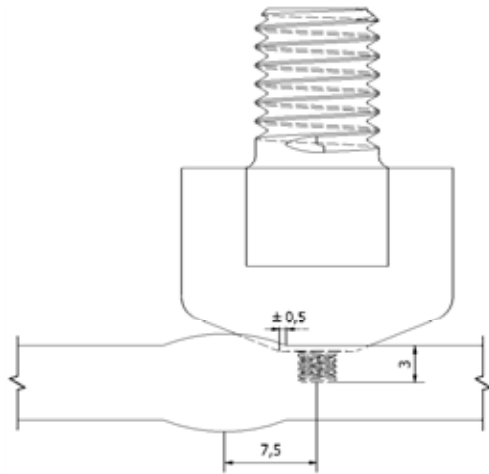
Schematic representation of the tool position relatively to MIG welded plate (dimensions in mm).
